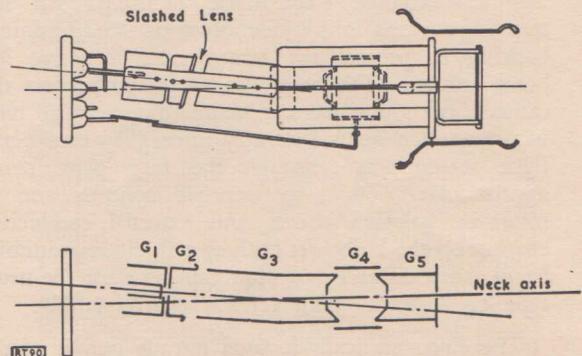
Complete gun assembly of type 17HP4B (RT90).
